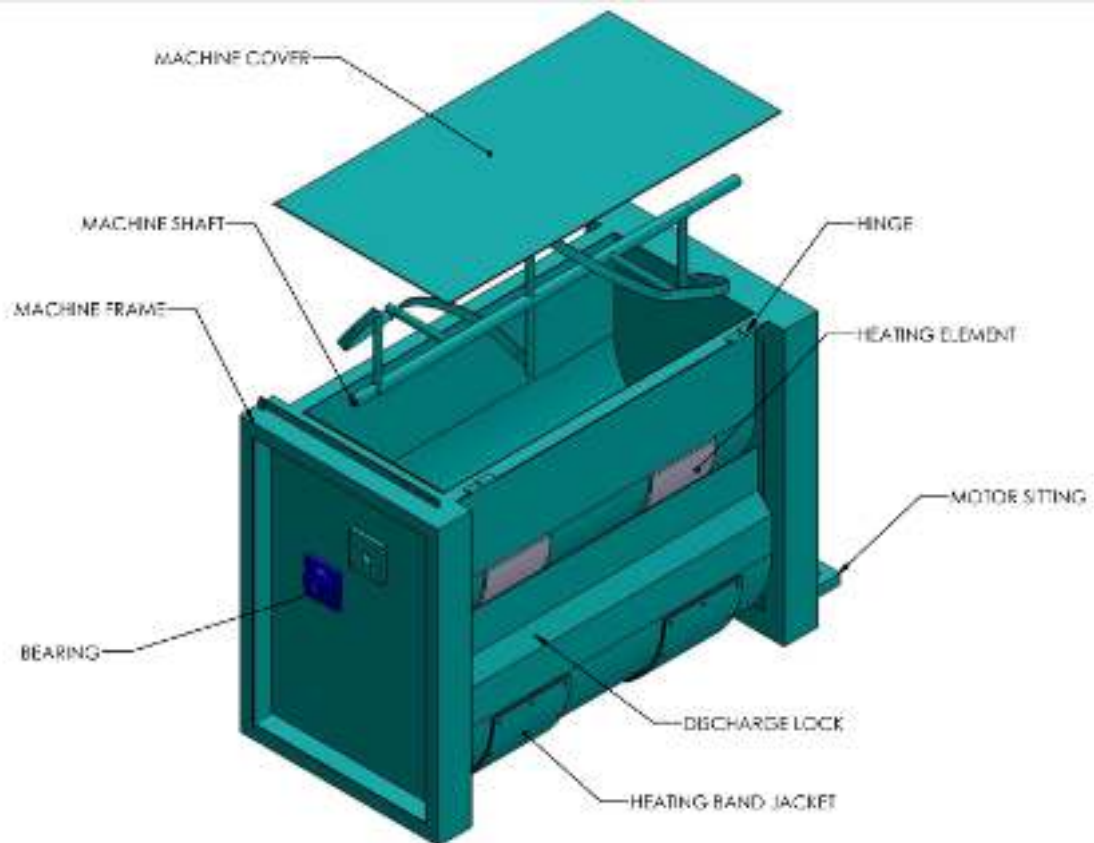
Exploded View of the developed Plastic Pellets Drying Machine.
